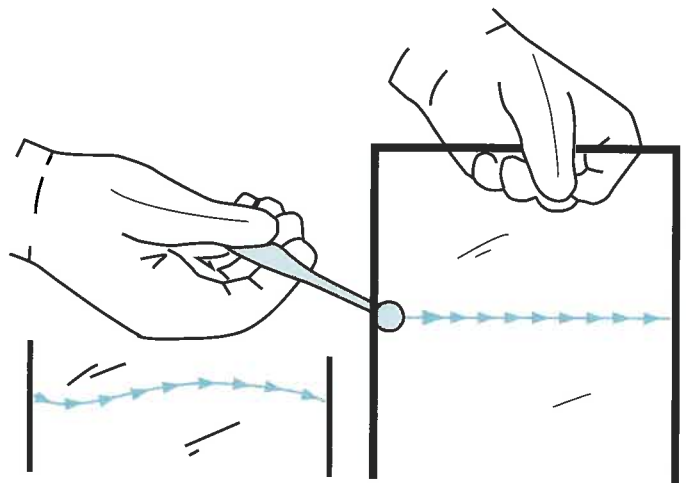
Both straight and curved scores can be fractured by tapping the glass. Use the handle end of the glass cutter.
